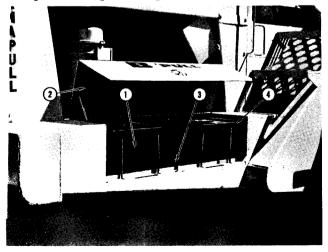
BATTERIES 4. Hold Down Plate 2. Cover 3. Spacer 1. Battery
